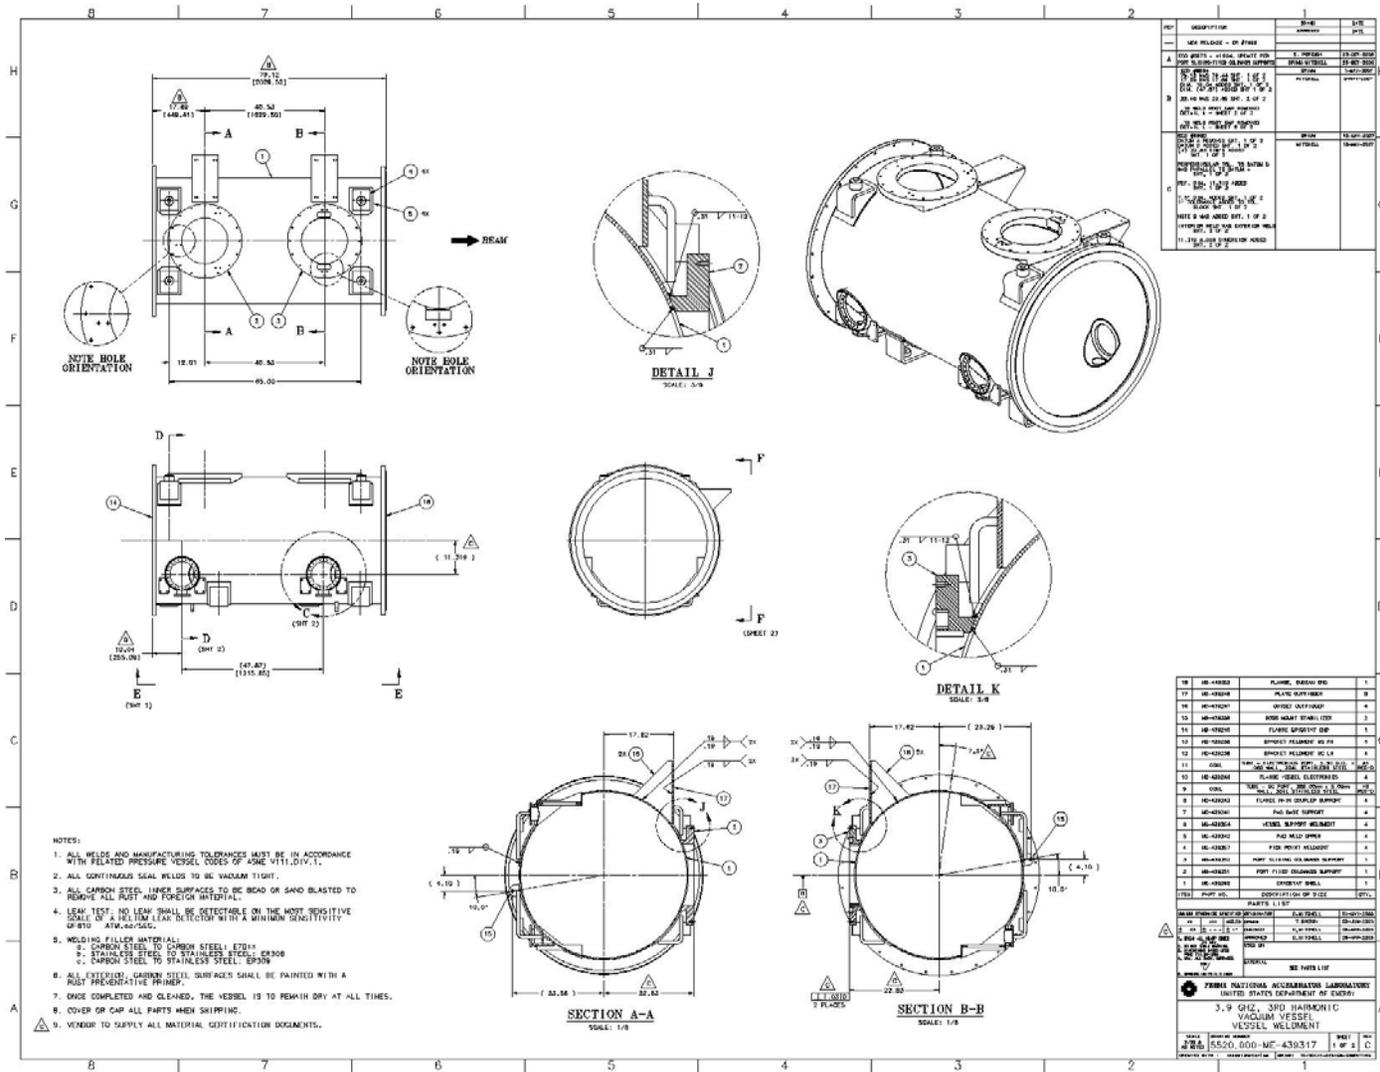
3.9-GHz, 3rd Harmonic Vacuum Vessel Drawing 5520.000-ME-439317, Sheet 1
